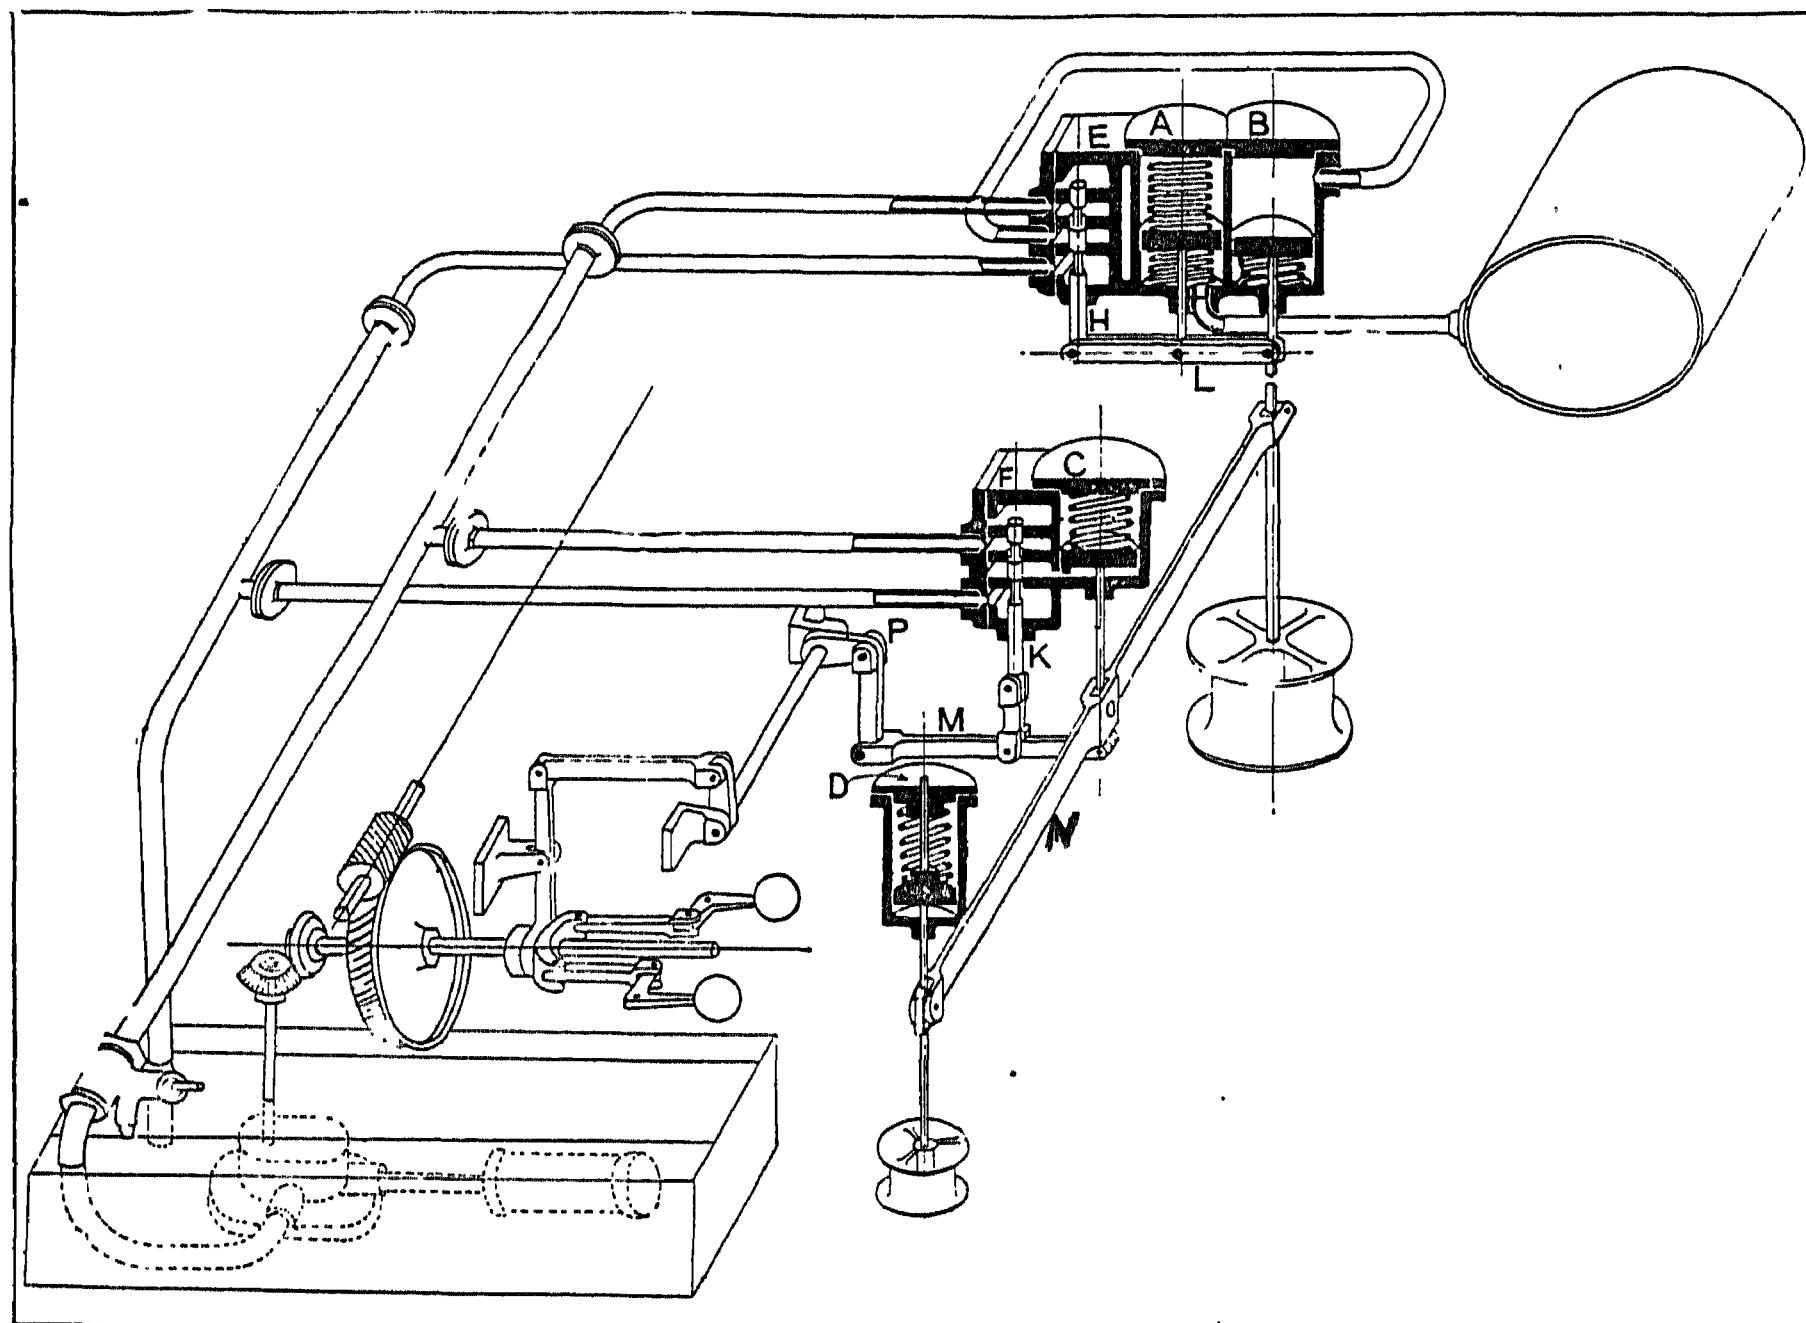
Isometric View of Valve Gear of Metropolitan-Vickers Mixed-pressure Turbine
